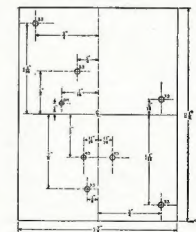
Drilling details on the circuit board chassis. The board is 1/16 inch thick and preferably with copper on both sides. If just one side is copper, drill as shown from the copper side. The numbers by the side of each hole indicate the drill gauge.
